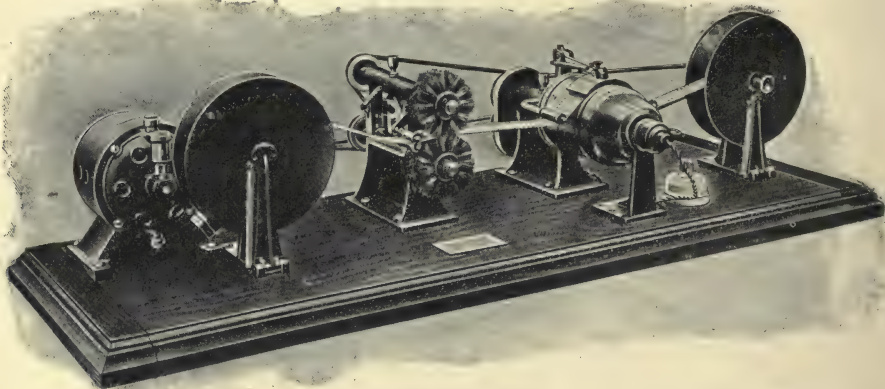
THE DEBIE NAMING AND BRUSHING MACHINE.
